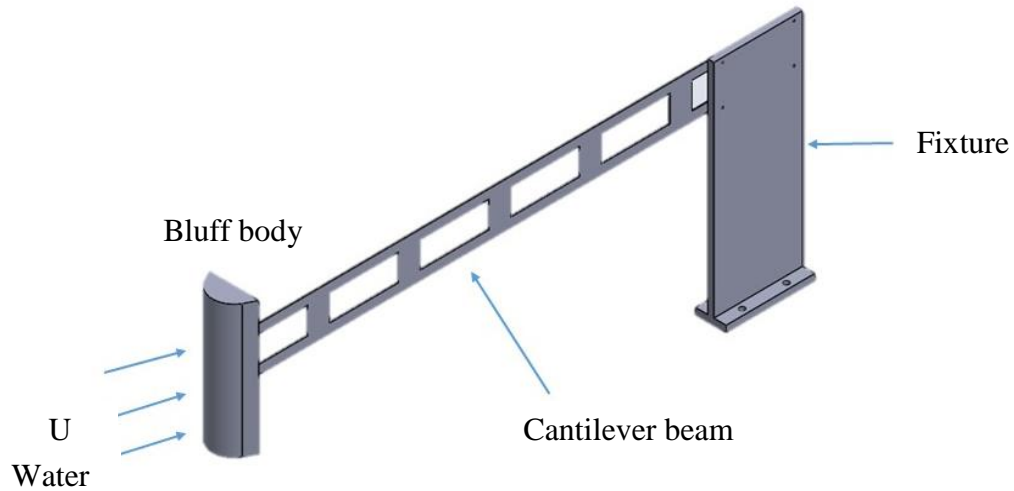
3D schematic of cantilever beam and bluff body with fixture
